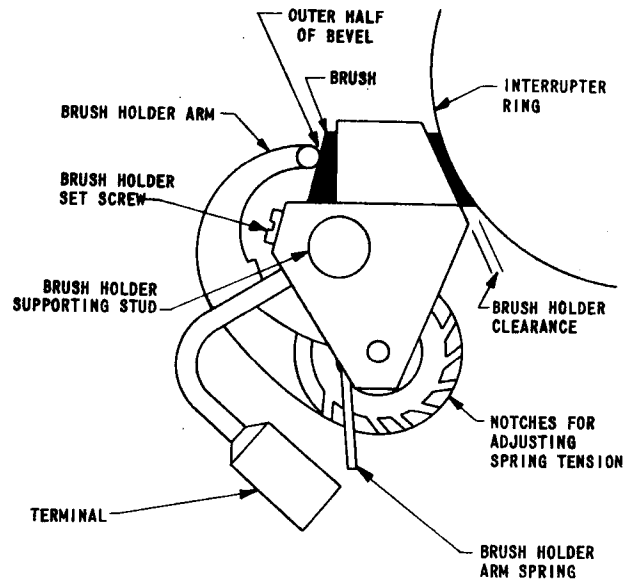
BRUSH AND BRUSH HOLDER - ASSEMBLY
